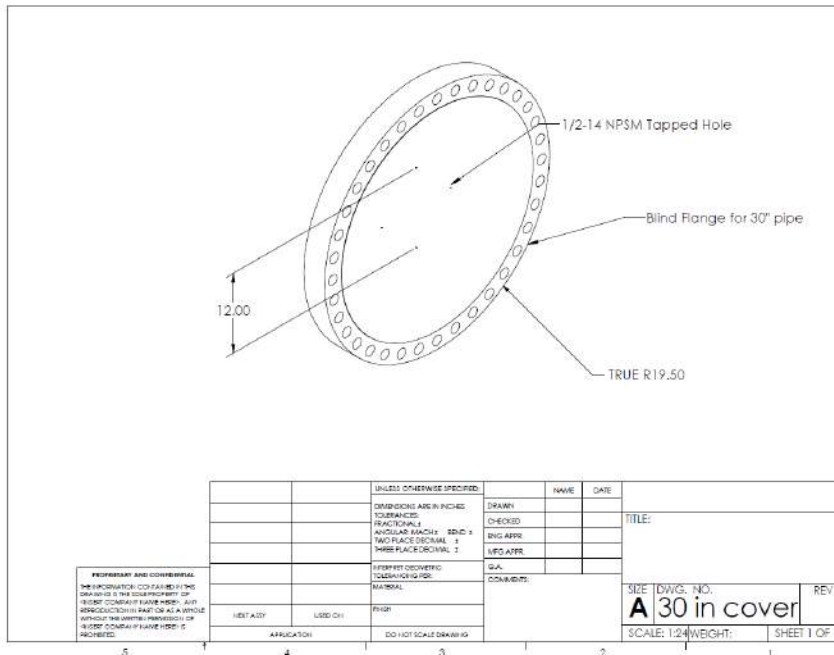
Two-dimensional CAD drawing of the blind flange drilled and tapped for pipe connections for fuel-air delivery and sensor attachments.
